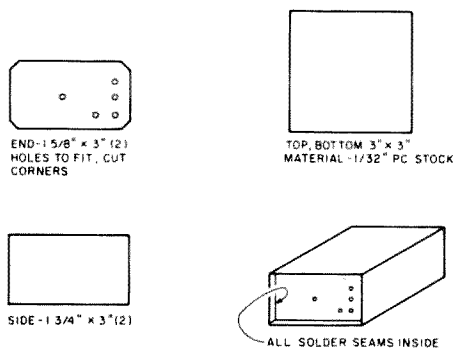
Shield box dimensions. Actual sizes are determined by the tuner used.
